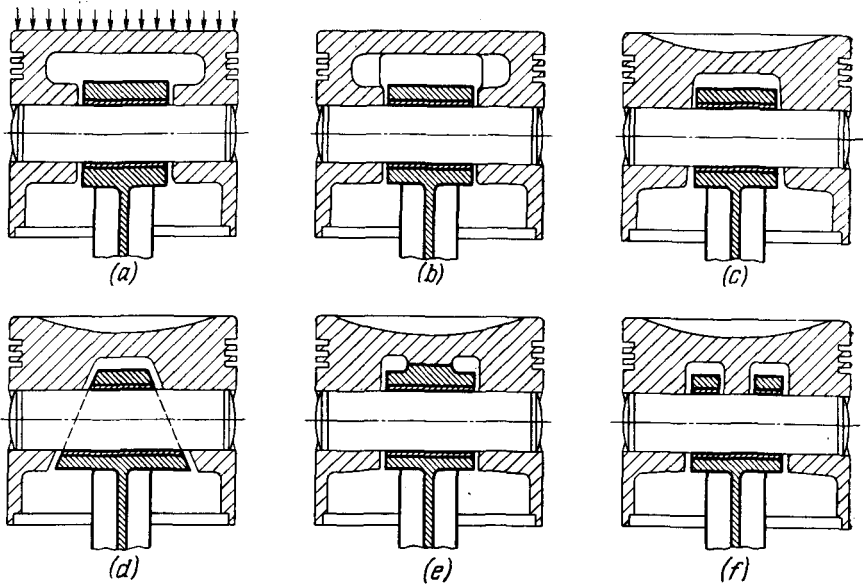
Elimination of bending in connecting-rod-to-piston joint
